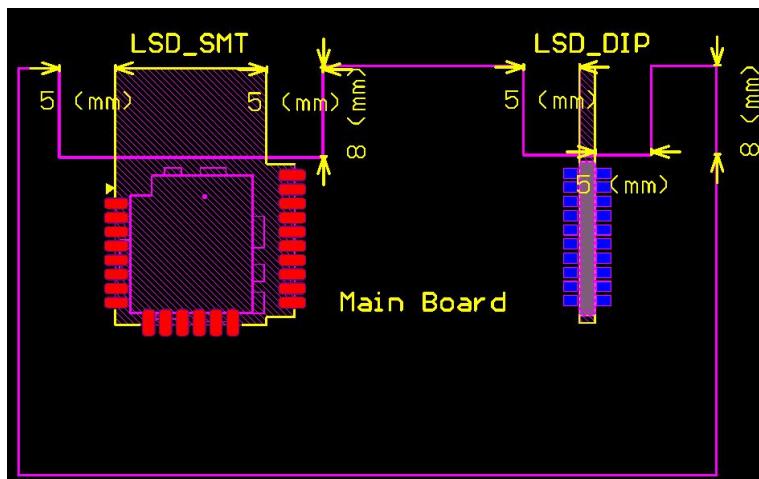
The PCB antenna is placed along the board side and its lower part is hollowed
